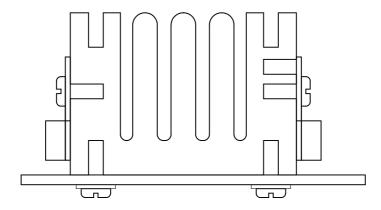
Assembly drawing of the heatsink onto which the stepper motor driver ICs are mounted.
